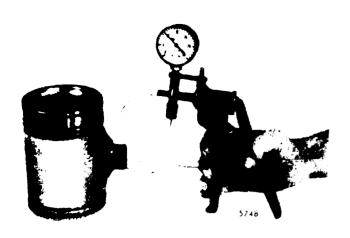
B-119. Checking Piston Pin Retainer for Proper Sealing
